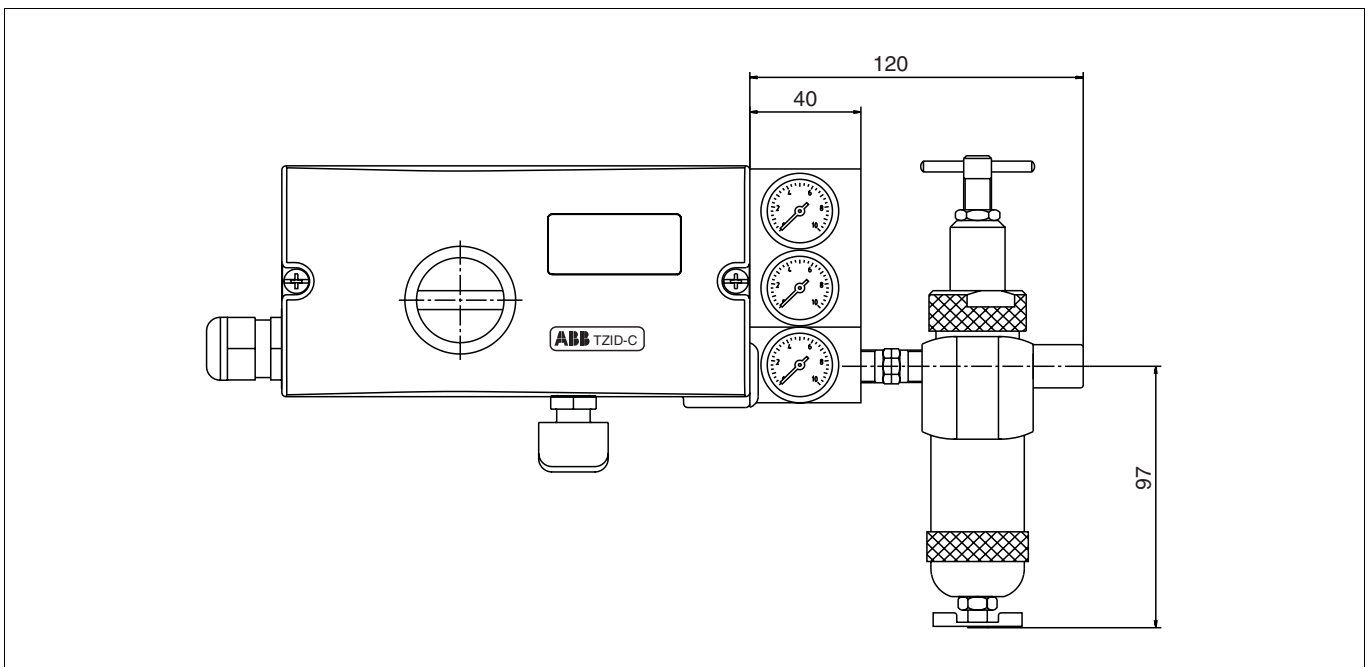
Positioner TZIDC-120 with pressure gauge block and filter regulator
